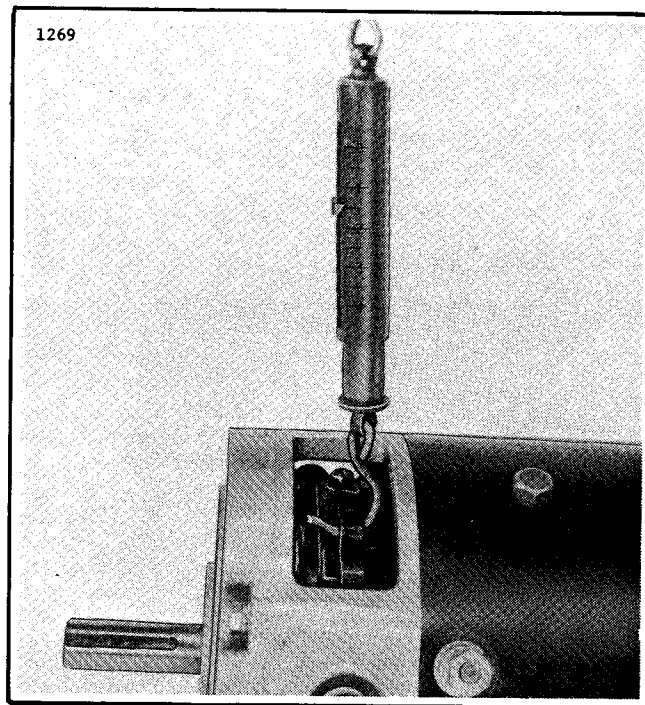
Brush Spring Tension (Hitachi or GE)
